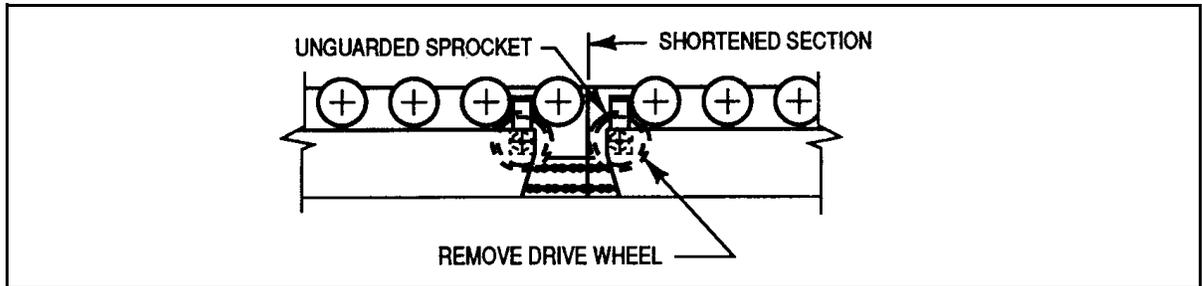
Removal of Unguarded Drive Wheel/sprocket
